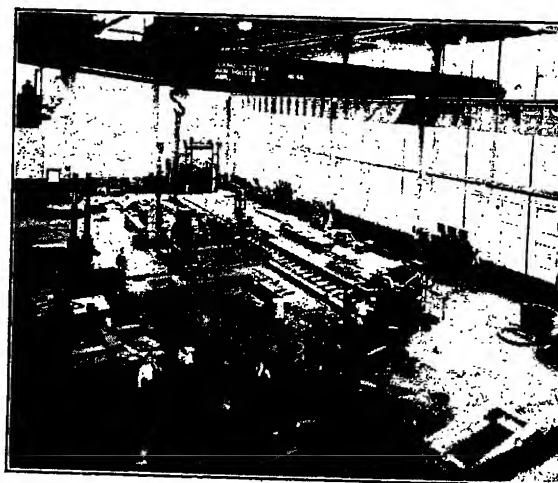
GENERAL VIEW OF NEW FABRICATION SHOP
